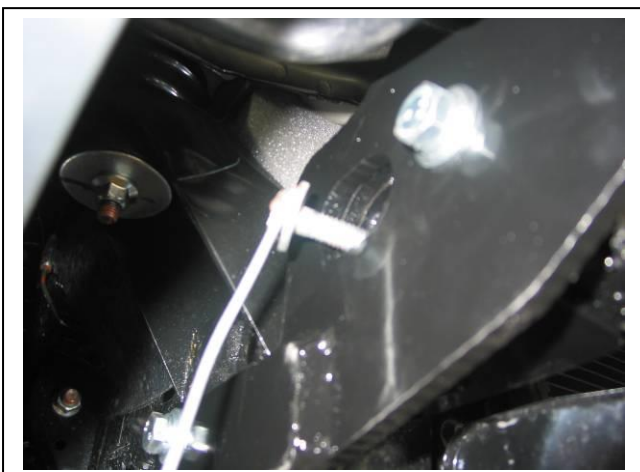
Feeding 3/8 x 1 1/2 bolt and washer on 300mm wire into chassis rail. Bend wire on bolt to suit requirements.
